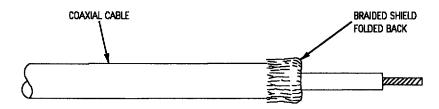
Cutting and Stripping Coaxial Cable and Shielding Jumper wires
